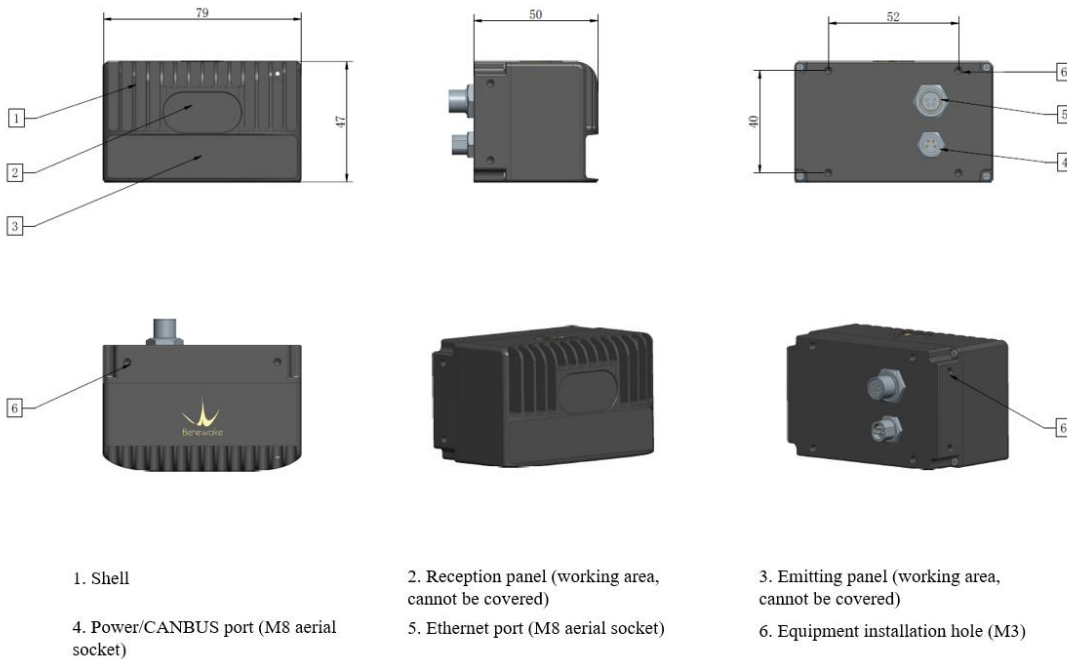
Outline Dimension Drawing of DE-LIADAR CE30
